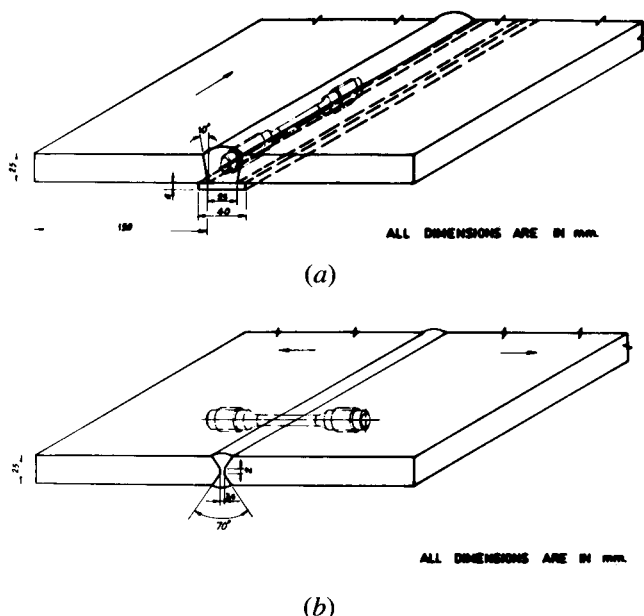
(a) Weld pad geometry for weld-metal samples. (b) Weld pad configuration for weld-joint specimens.
